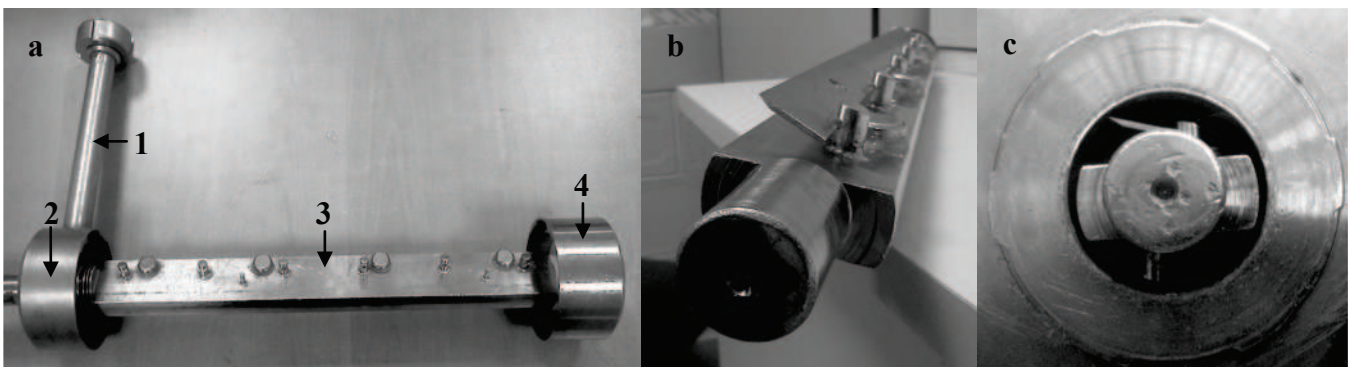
Real representation of the integrating parts of the SSHE. (a) 1. Inlet connection for sorbet mix. 2. Inlet cover bowl. 3. Rotor. 4. Outlet cover bowl. (b) Rotor equipped with two rows of scraper blades. (c) Front view of rotor with the scraper blades rows.
